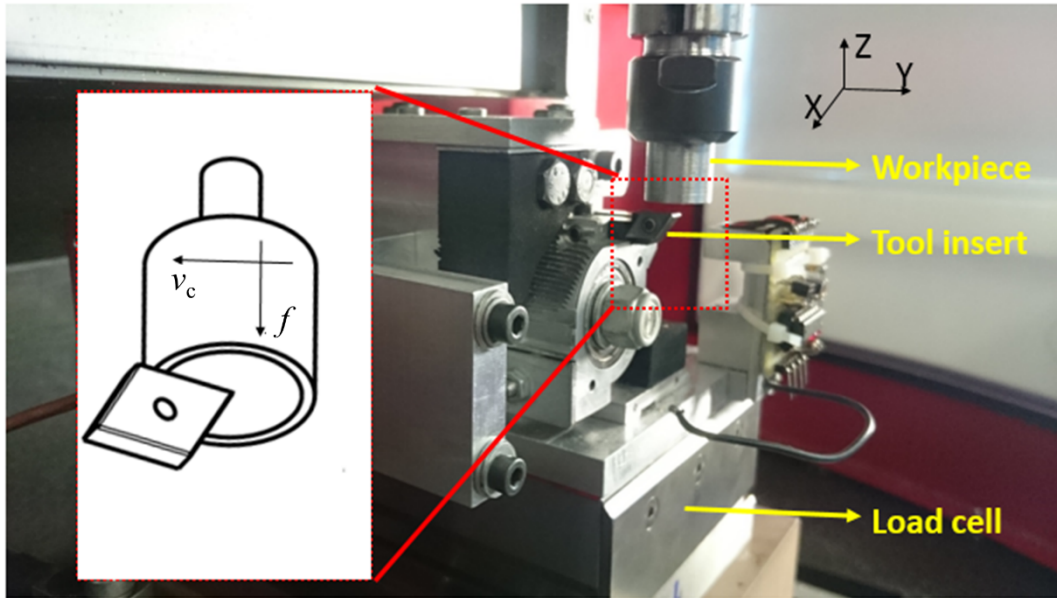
Micro orthogonal cutting setup on a Kern EVO machining center
